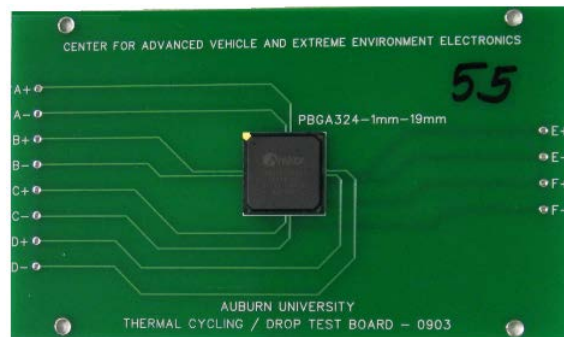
PCB (L*B =132* 77mm² and thickness 1.5mm) and one PBGA-324 package located at centre of the test board
